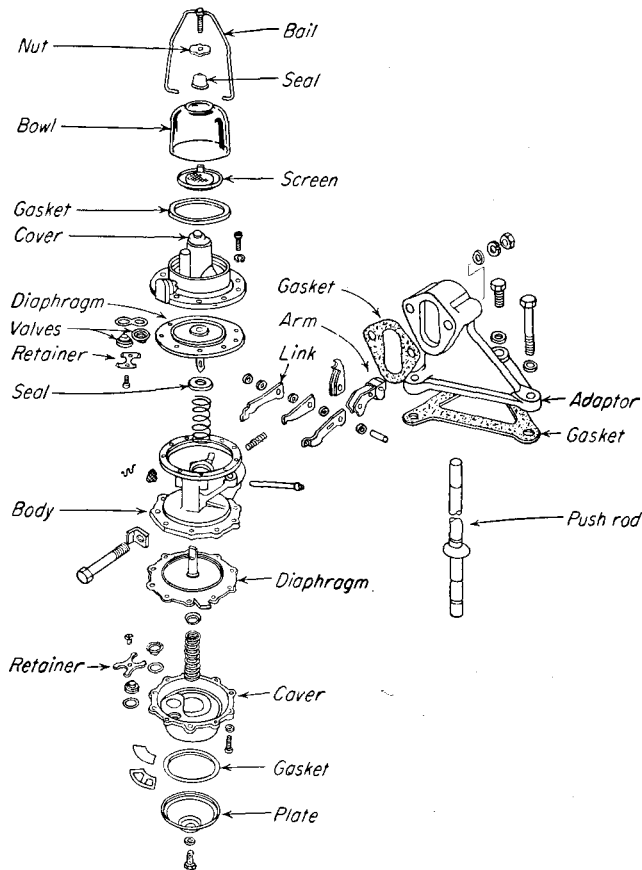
Disassembled view of combination fuel and vacuum pump. (Ford Motor Company)
